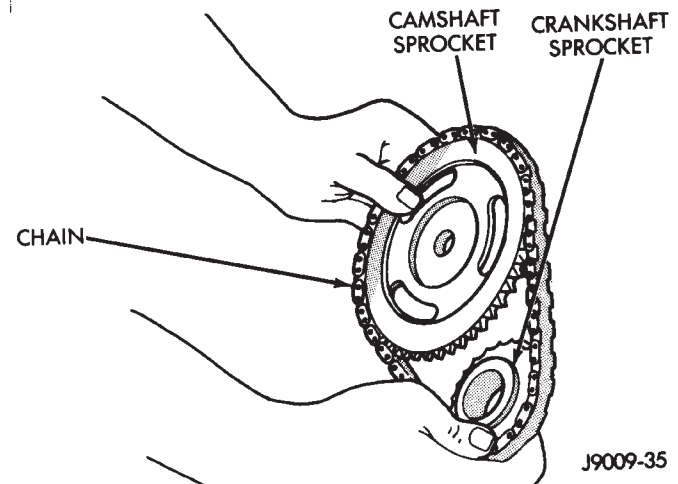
Camshaft and Crankshaft Sprocket and Chain
